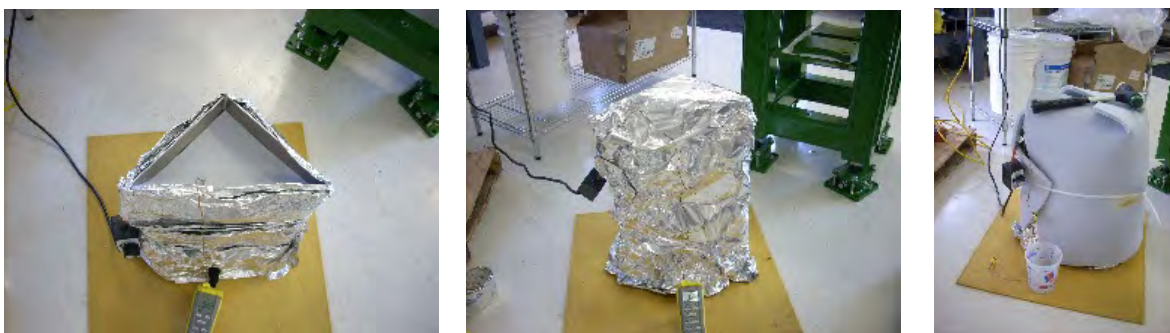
The steel mold filled with proper mixtures while heating with tape heaters
